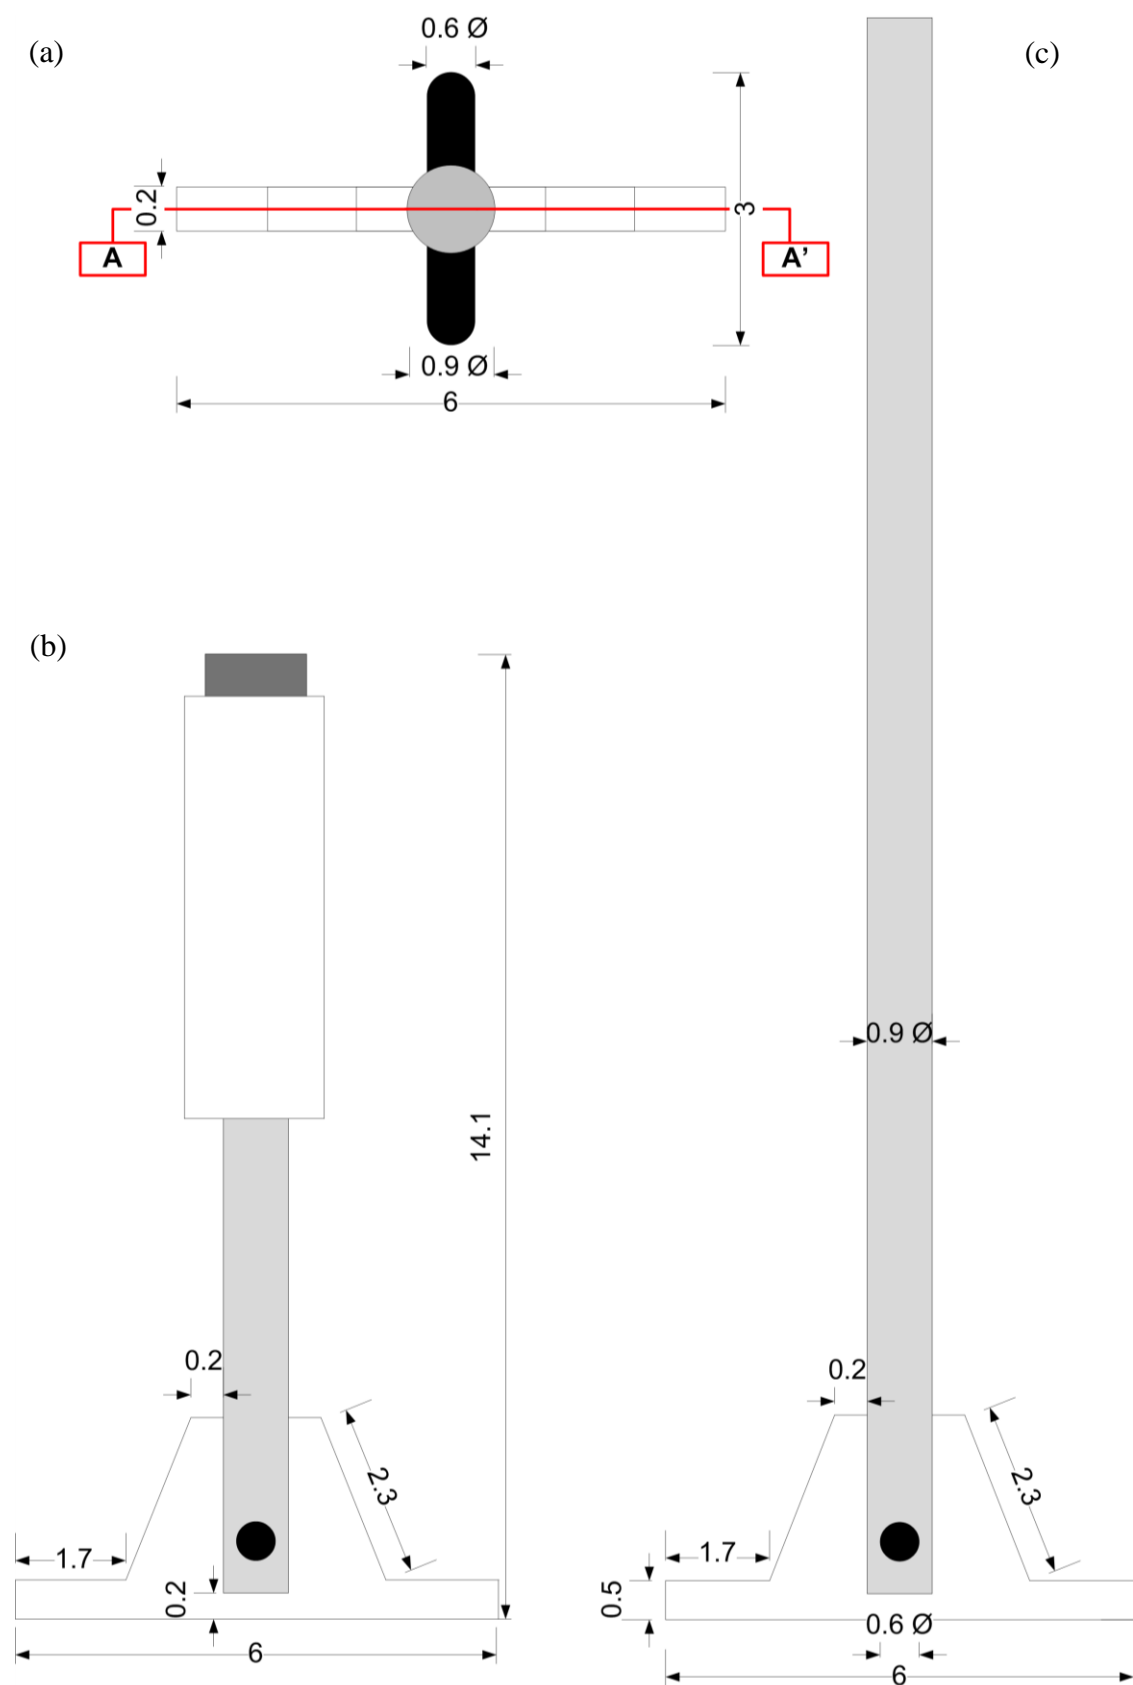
Impeller dimensions and geometry: (a) top view; (b) side view of the original magnetic paddle impeller (through A – A’); (c) side view of the impeller used for motor-driven agitation (through A – A’). Units in cm.
